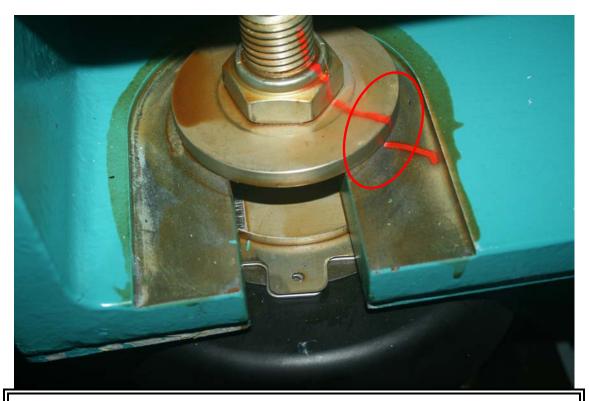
Right rear generator mount. Elastomeric insert bolting moved.
